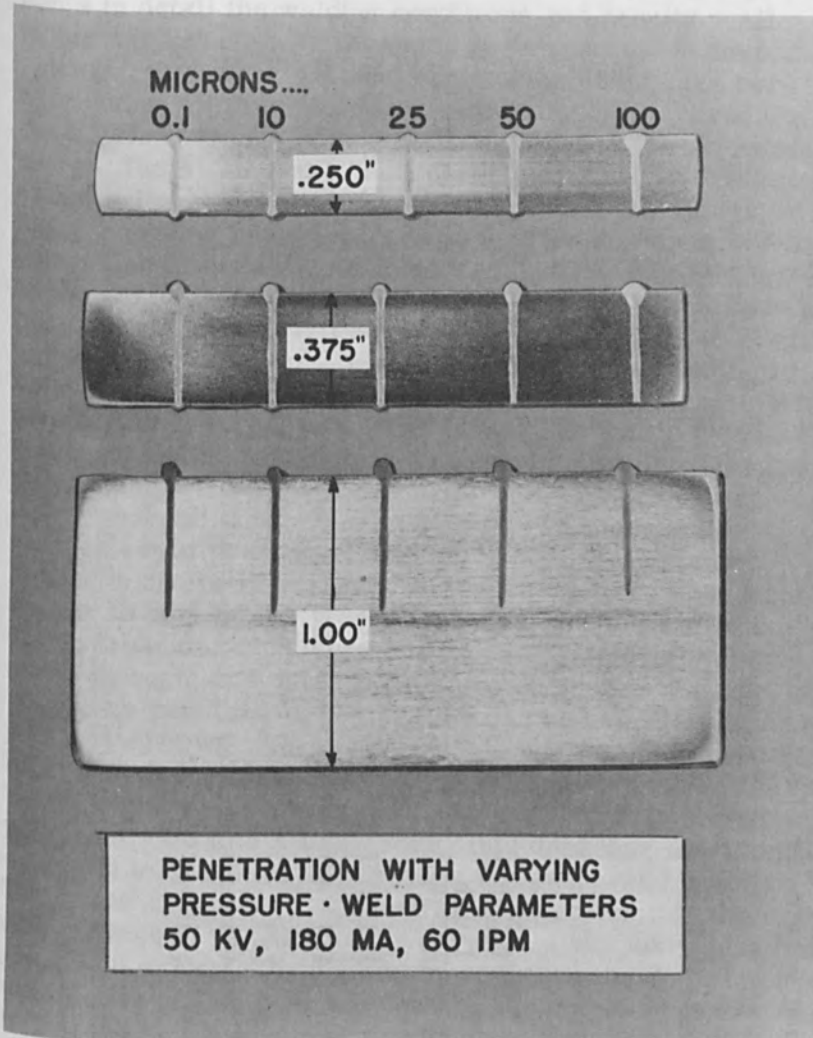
Transverse Cross-section of Medium Vacuum Electron Beam Weld Specimen showing effect of several pressure levels upon weld penetration depth.
